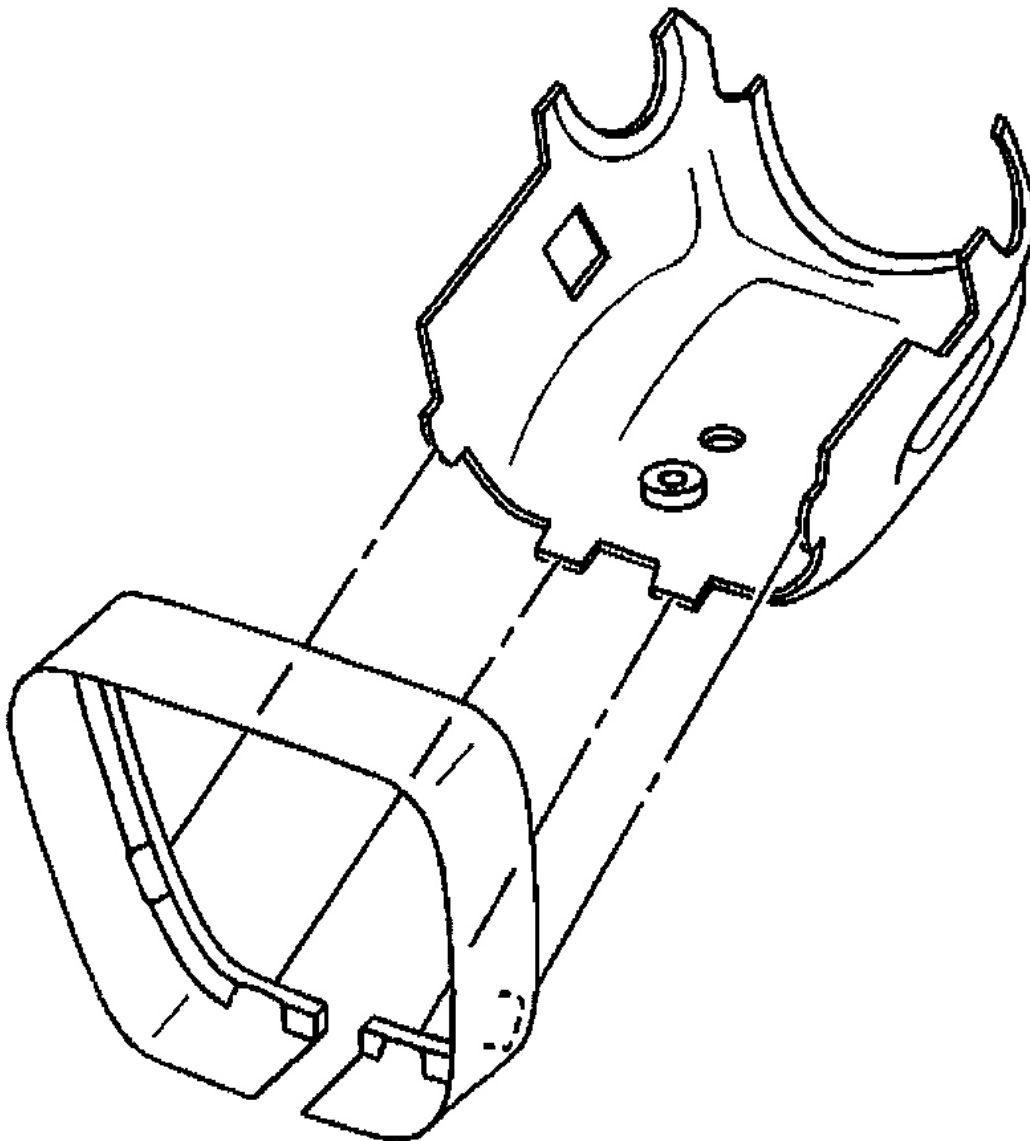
Installing Upper Steering Column Trim Covers Screws
